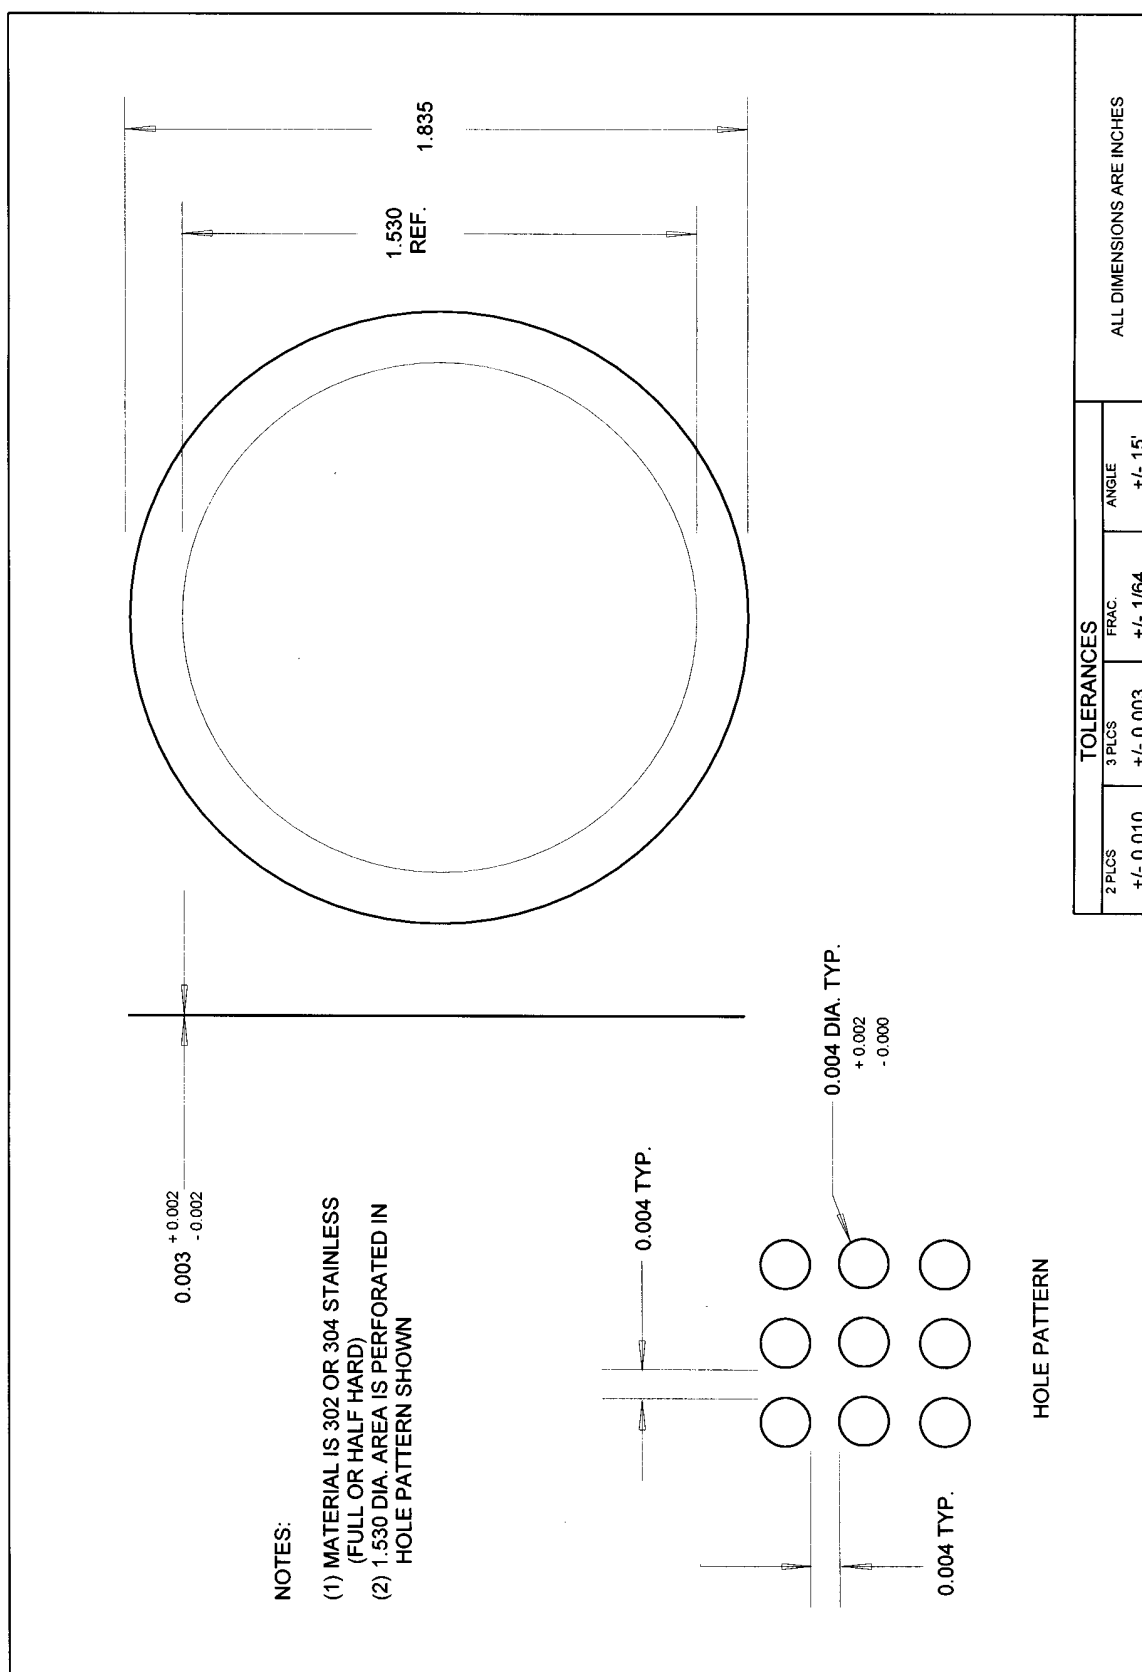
FILTER CASSETTE, LOWER SECTION
